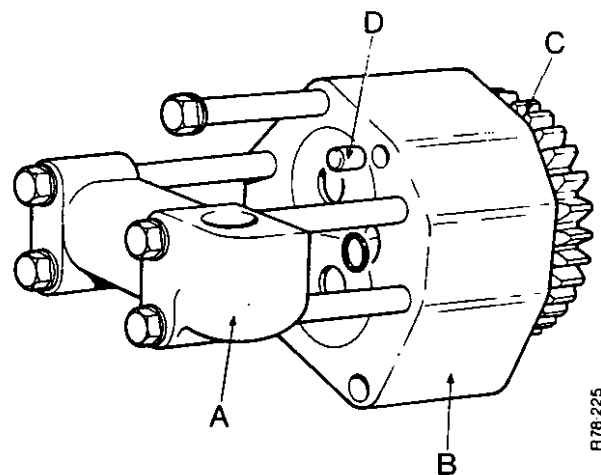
TRANSMISSION OIL PUMP REMOVAL
